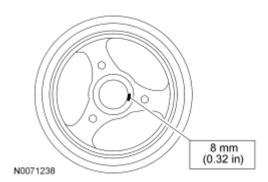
Applying Sealant To Woodruff Key Slot Courtesy of FORD MOTOR CO.
